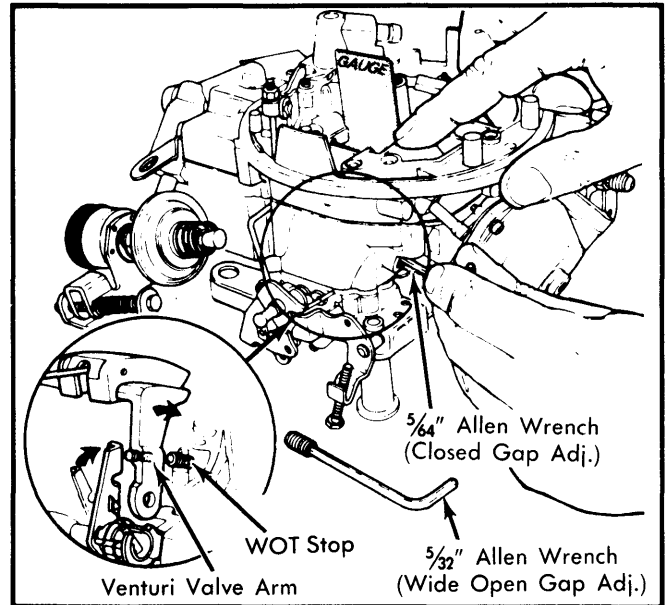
Venturi Valve Wide Open Throttle Adjustment
